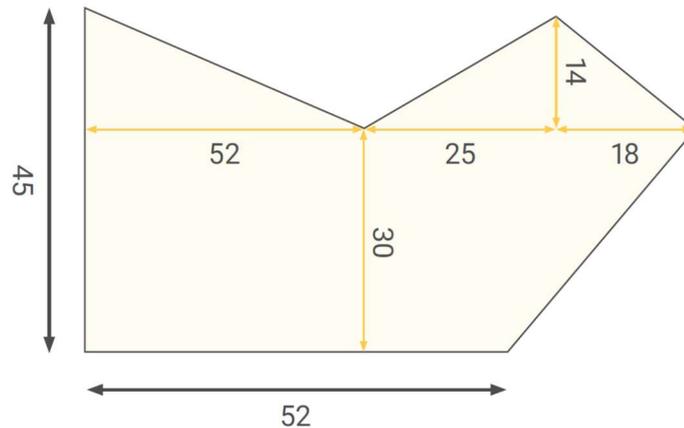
Template for assessing size of palm impact protector (dimensions in mm)
